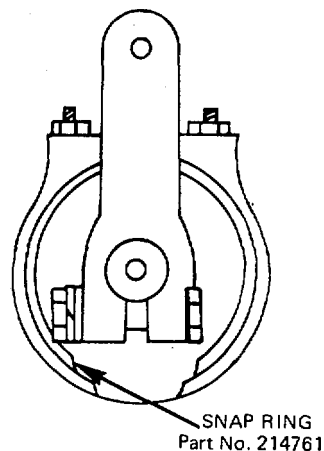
F5291. Throttle Shaft Snap Ring Installed
